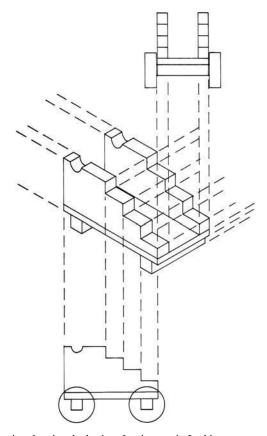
Drawing showing the basics of an isometric. In this case, a gun carriage is shown.
